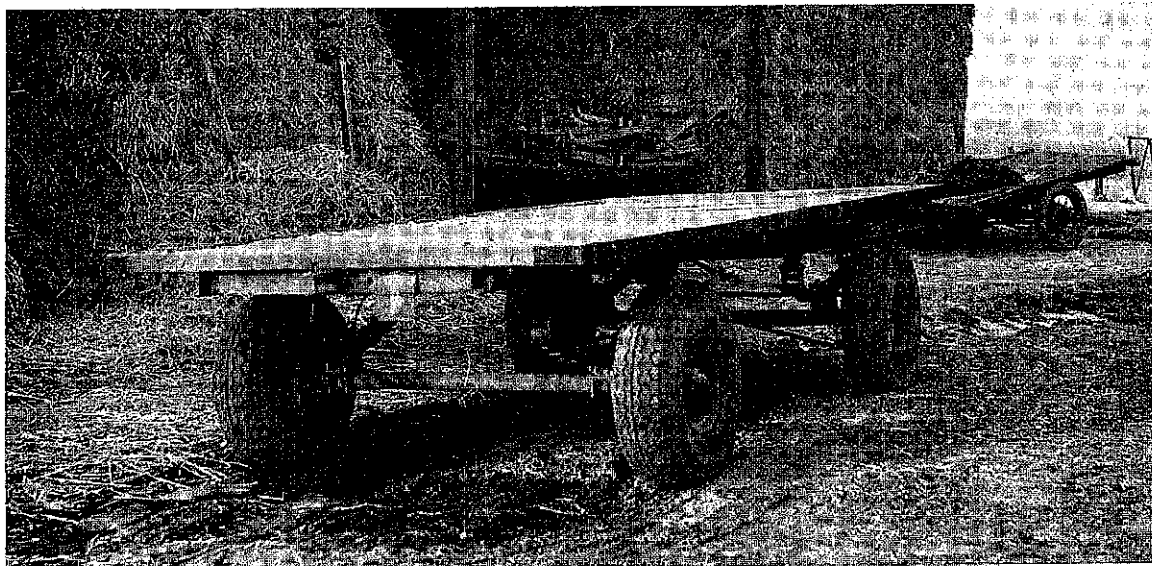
AN EX-R.A.F. PETROL TANKER CONVERTED INTO A FARM TRAILER WITH THE ASSISTANCE OF OXY-ACETYLENE WELDING AND HAND CUTTING.
